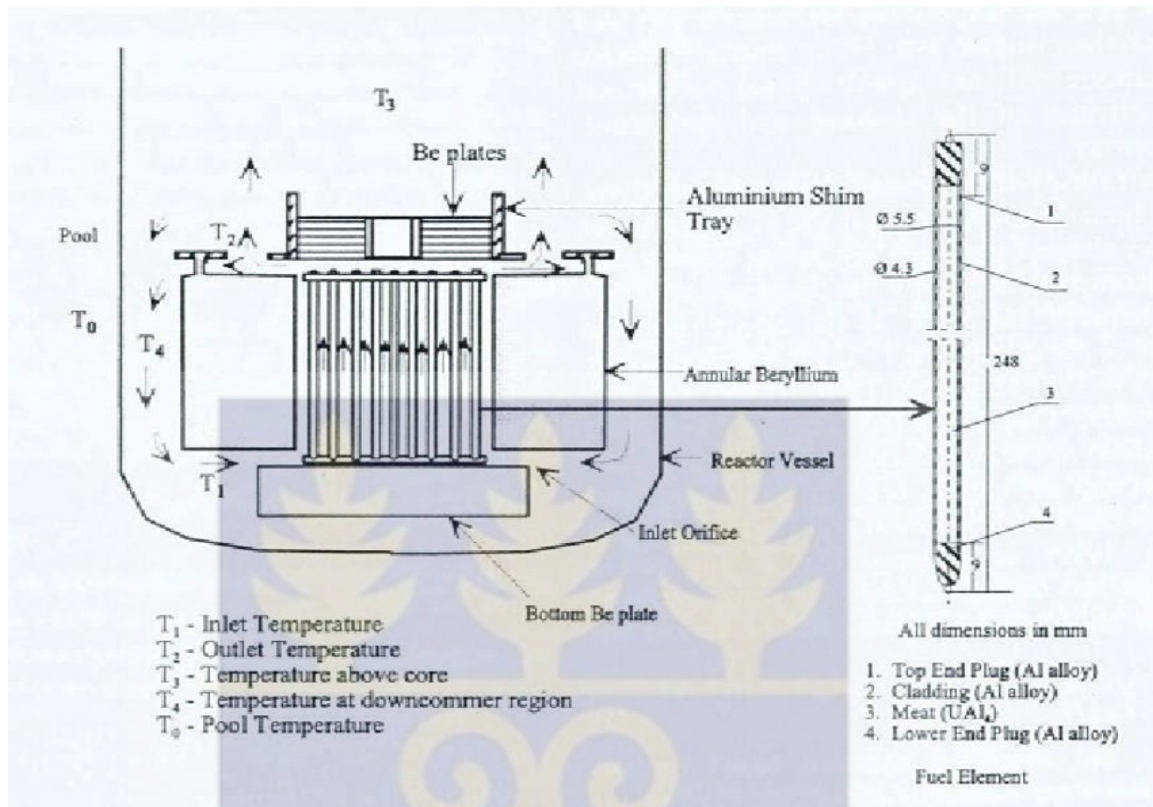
A schematic view of the LEU fuel element assembly for the GHARR-1.
